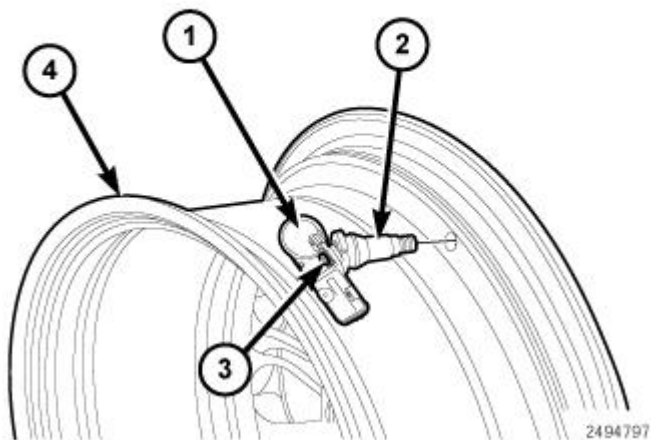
Valve Stem Retainer Screw, Sensor & Valve Stem
